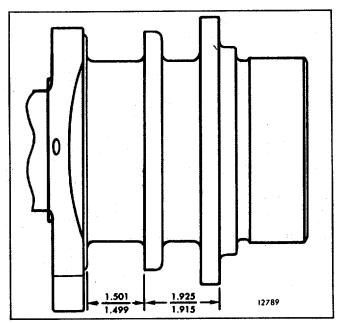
Standard Dimensions at Crankshaft Thrust Surfaces
